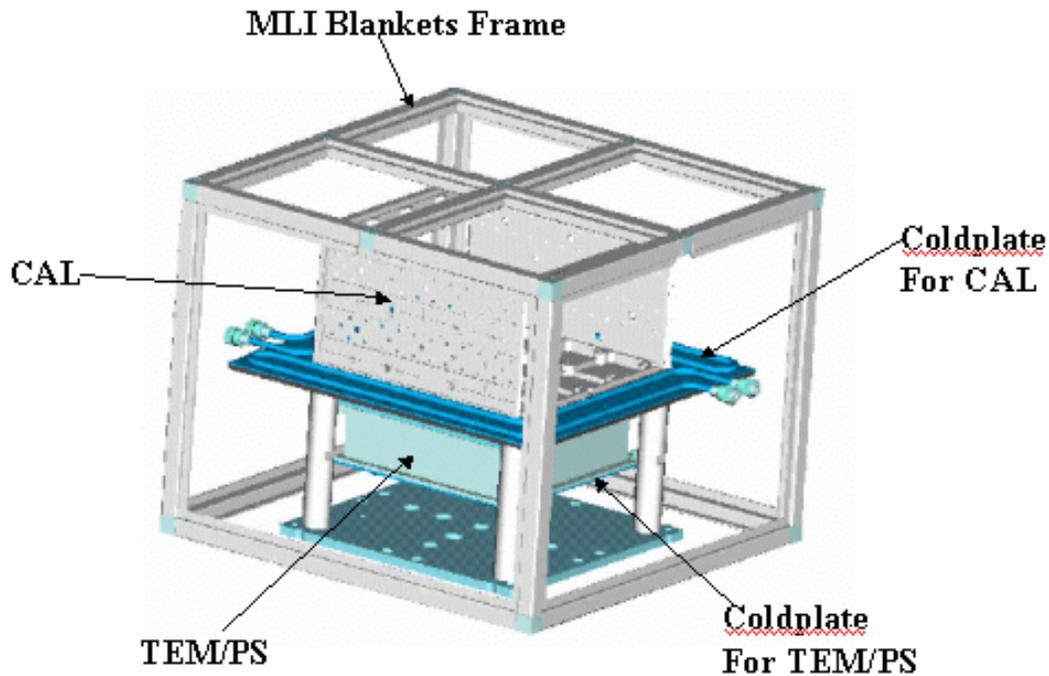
Test Fixture Set-up for Thermal Vacuum Test
